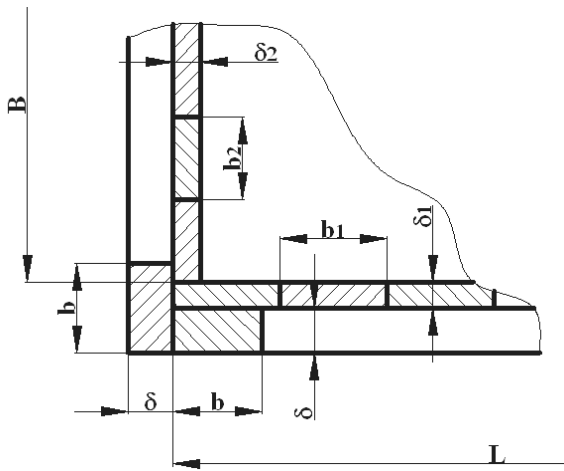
Elements that download the stacking forces. Boxes with transversal lamellas on side panels and end panels
